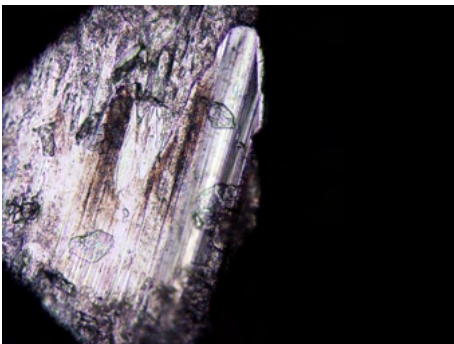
Fracture surface microscopy after heat treatment and material testing.
